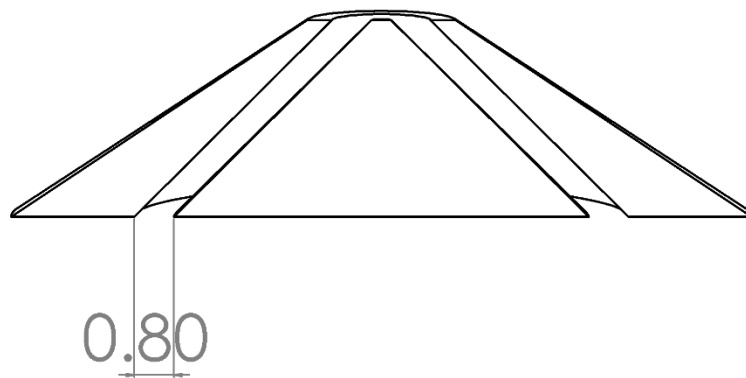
Cross section of sample 3. All dimensions are in millimeters.
